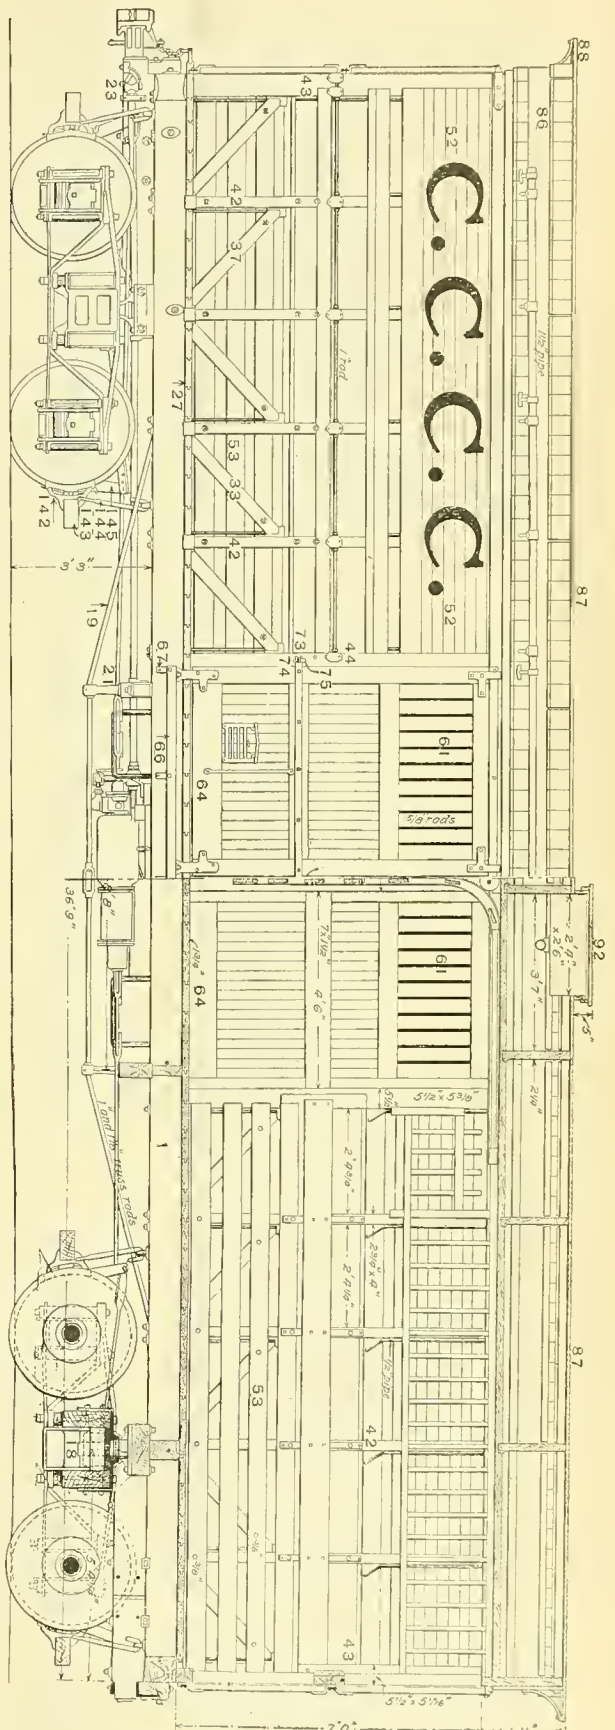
Half Side Elevation and Half Longitudinal Section.
